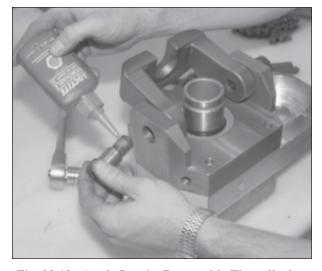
Apply Loctite Removable Threadlocker on shoulder bolt threads.
